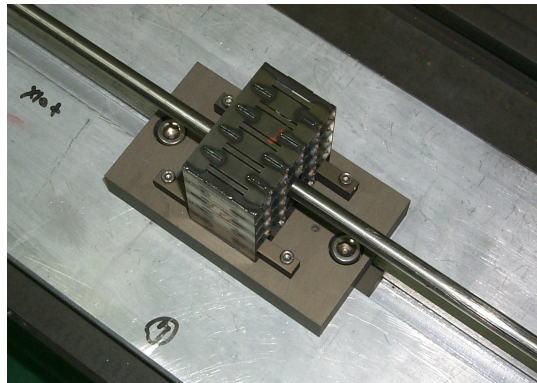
Shape of the fuel rod inserted in the spacer grid
